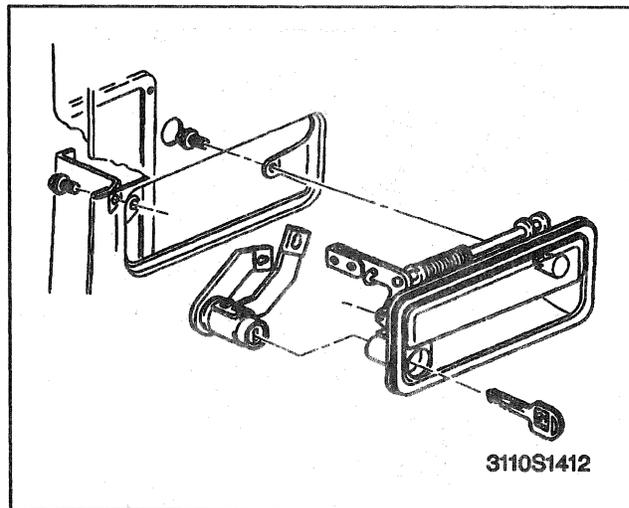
Rear Cargo Door Outside Handle and Lock Assembly
